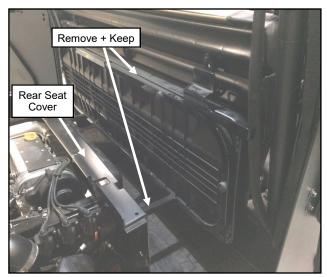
(Remove Seat Bottom Cushion with Frame)
